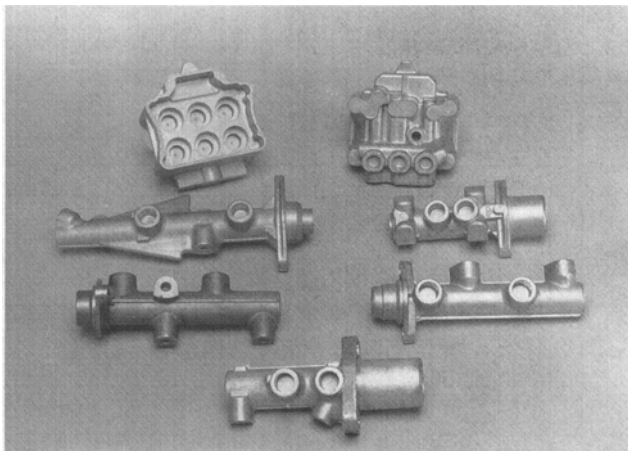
Aluminum alloy automotive brake system components produced by semisolid forging (courtesy of ALUMAX Engineered Metal Processes, Inc., St. Louis, MO).
